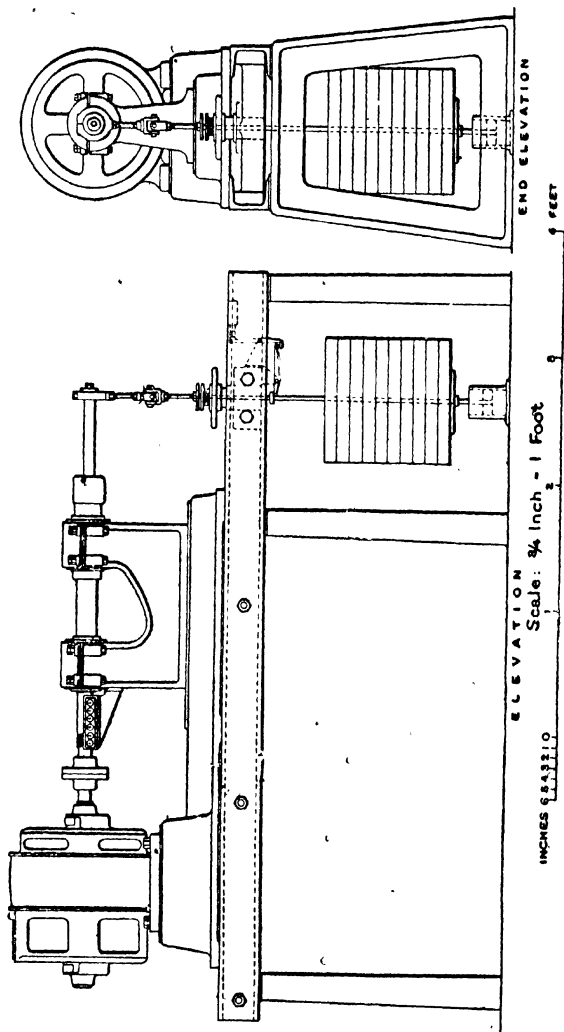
THE N.P.L. WÖHLER FATIGUE TESTING MACHINE.
